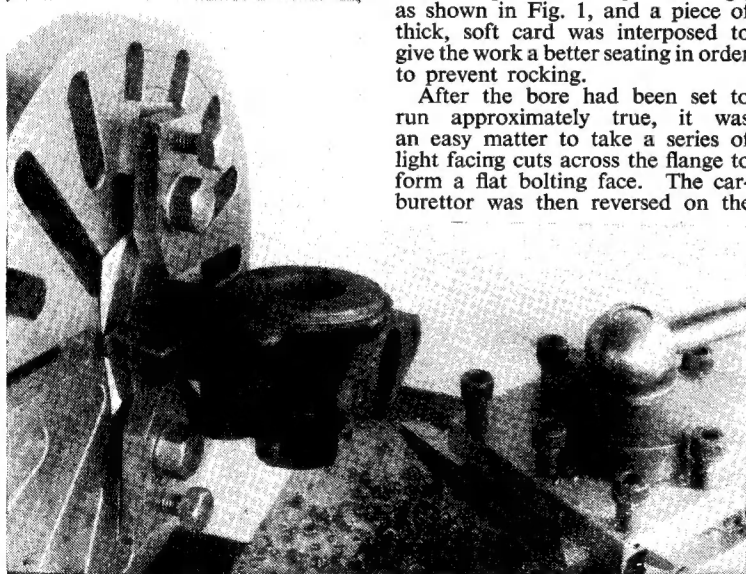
Machining the carburettor flanges on the lathe faceplate
